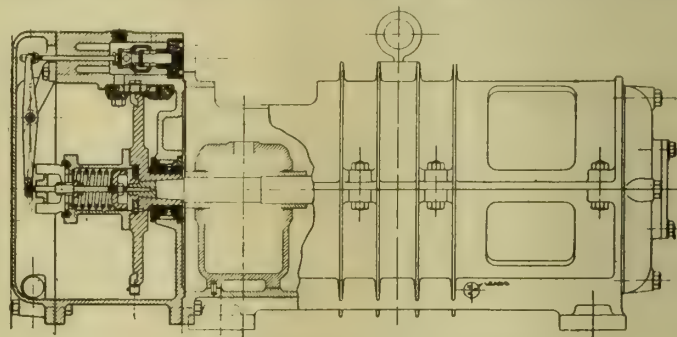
TURBO-ELECTRIC MACHINE, FOR LOCOMOTIVE HEADLIGHT.
